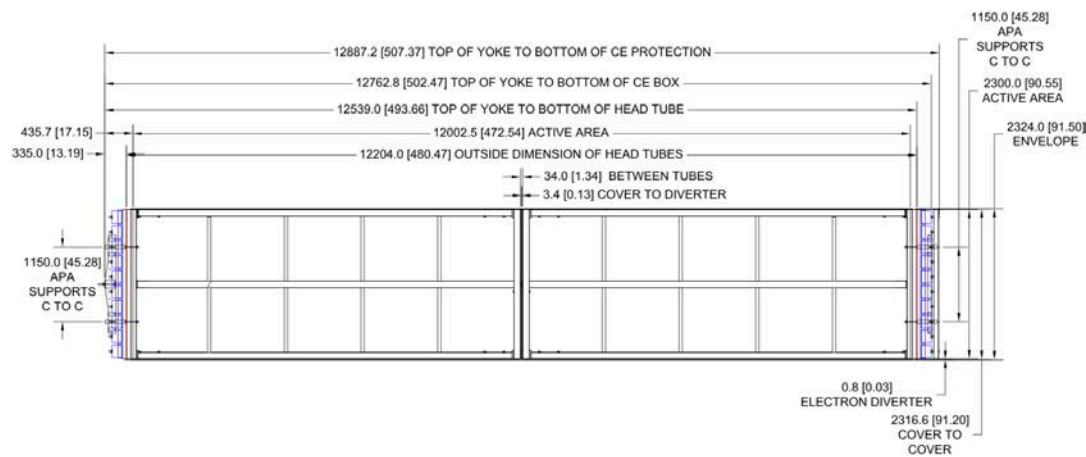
Diagram of an APA pair, with connected bottom and top APA. The dimensions of the APA pair, including the accompanying cold electronics and mechanical supports (the yoke), are indicated.
